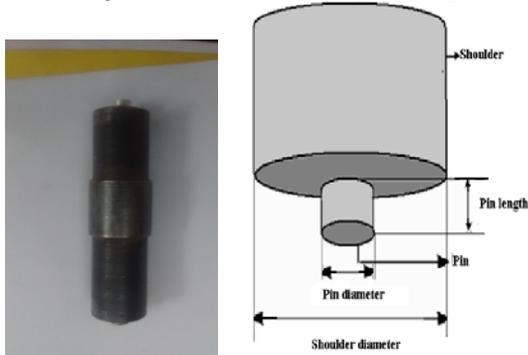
Friction stir welding Tool H13 and Tool geometry
